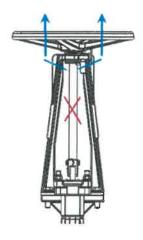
Knife Gate Valve with Handwheel or Chainwheel Actuator, Vertical Lifting
